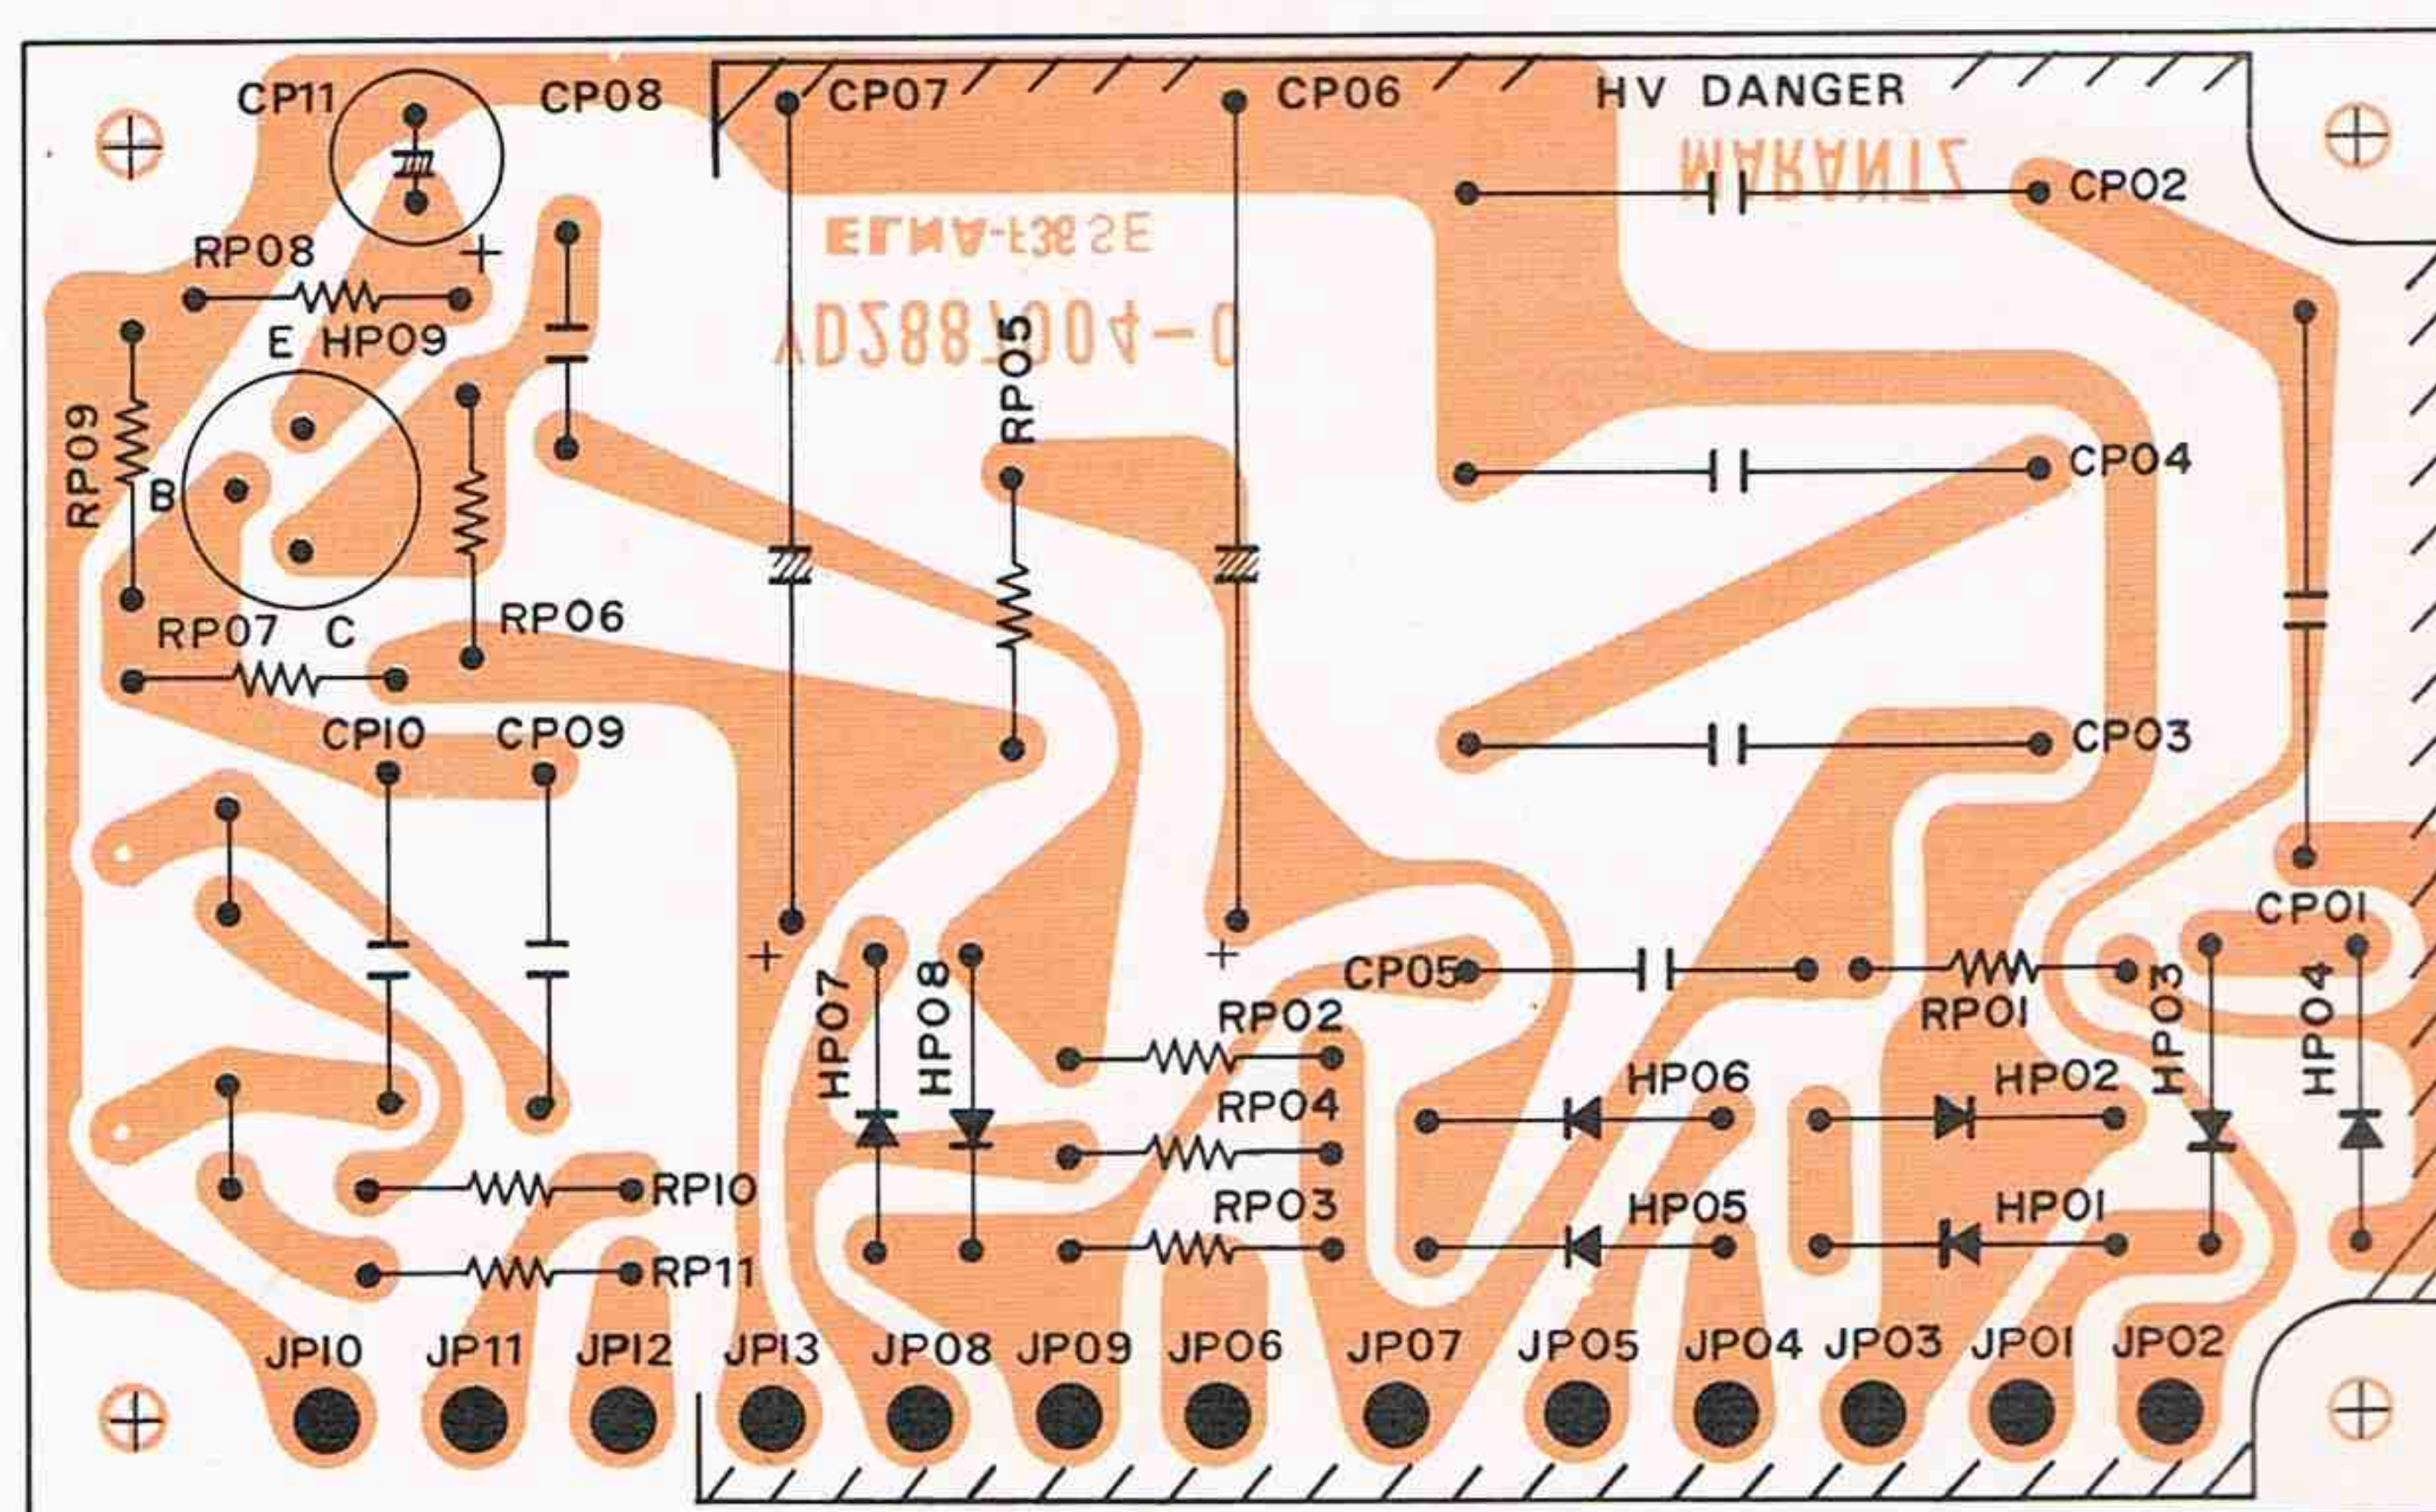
High Voltage Power Supply and Spot Killer Assembly PP01 Component Locations
